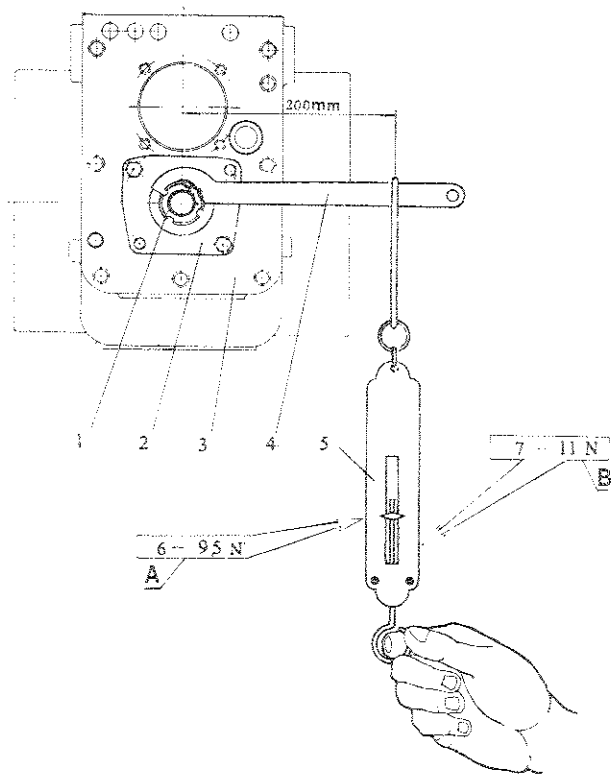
Preloading of front bearing of the second shaft and that of the differential bearing
